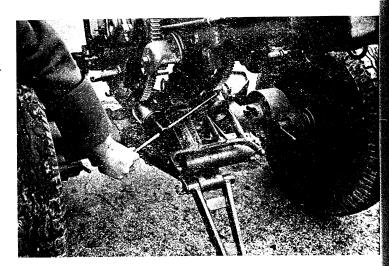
EQUILIBRATOR SPRING REMOVING
